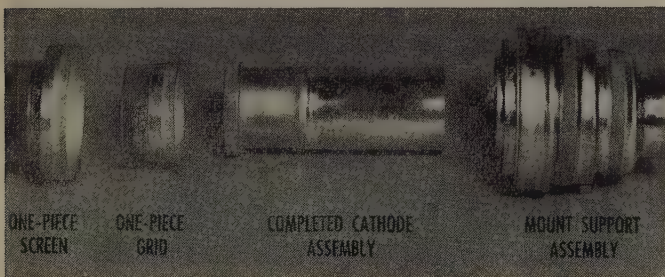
Screen grid, control grid, cathode assembly, and mount support assembly.
